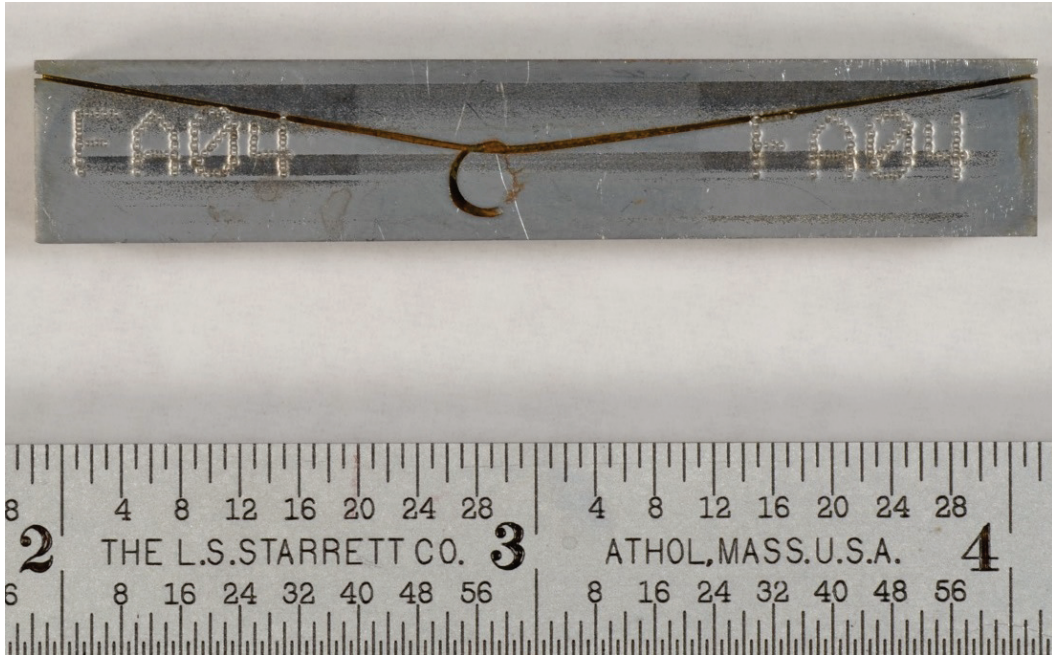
CVN blank FA04 showing weld void that caused EDM gap fault [17].
